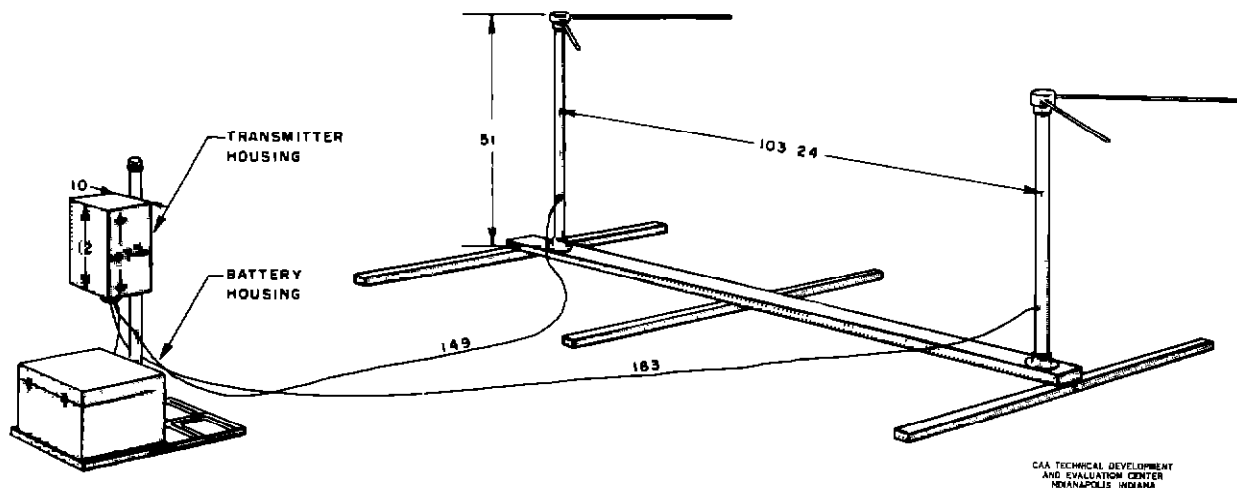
Dimensioned Drawing of TVOR-Marker Components
